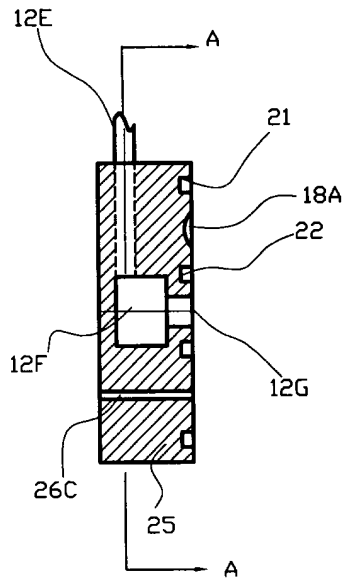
A Sectional view of piece 25 of the drug feeder 2
